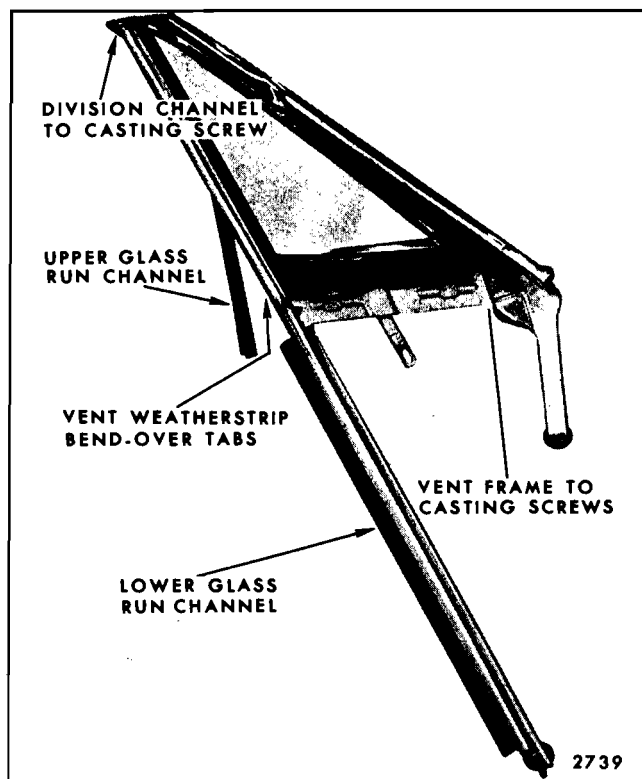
Front Door Ventilator Assembly - "A" Closed Styles
